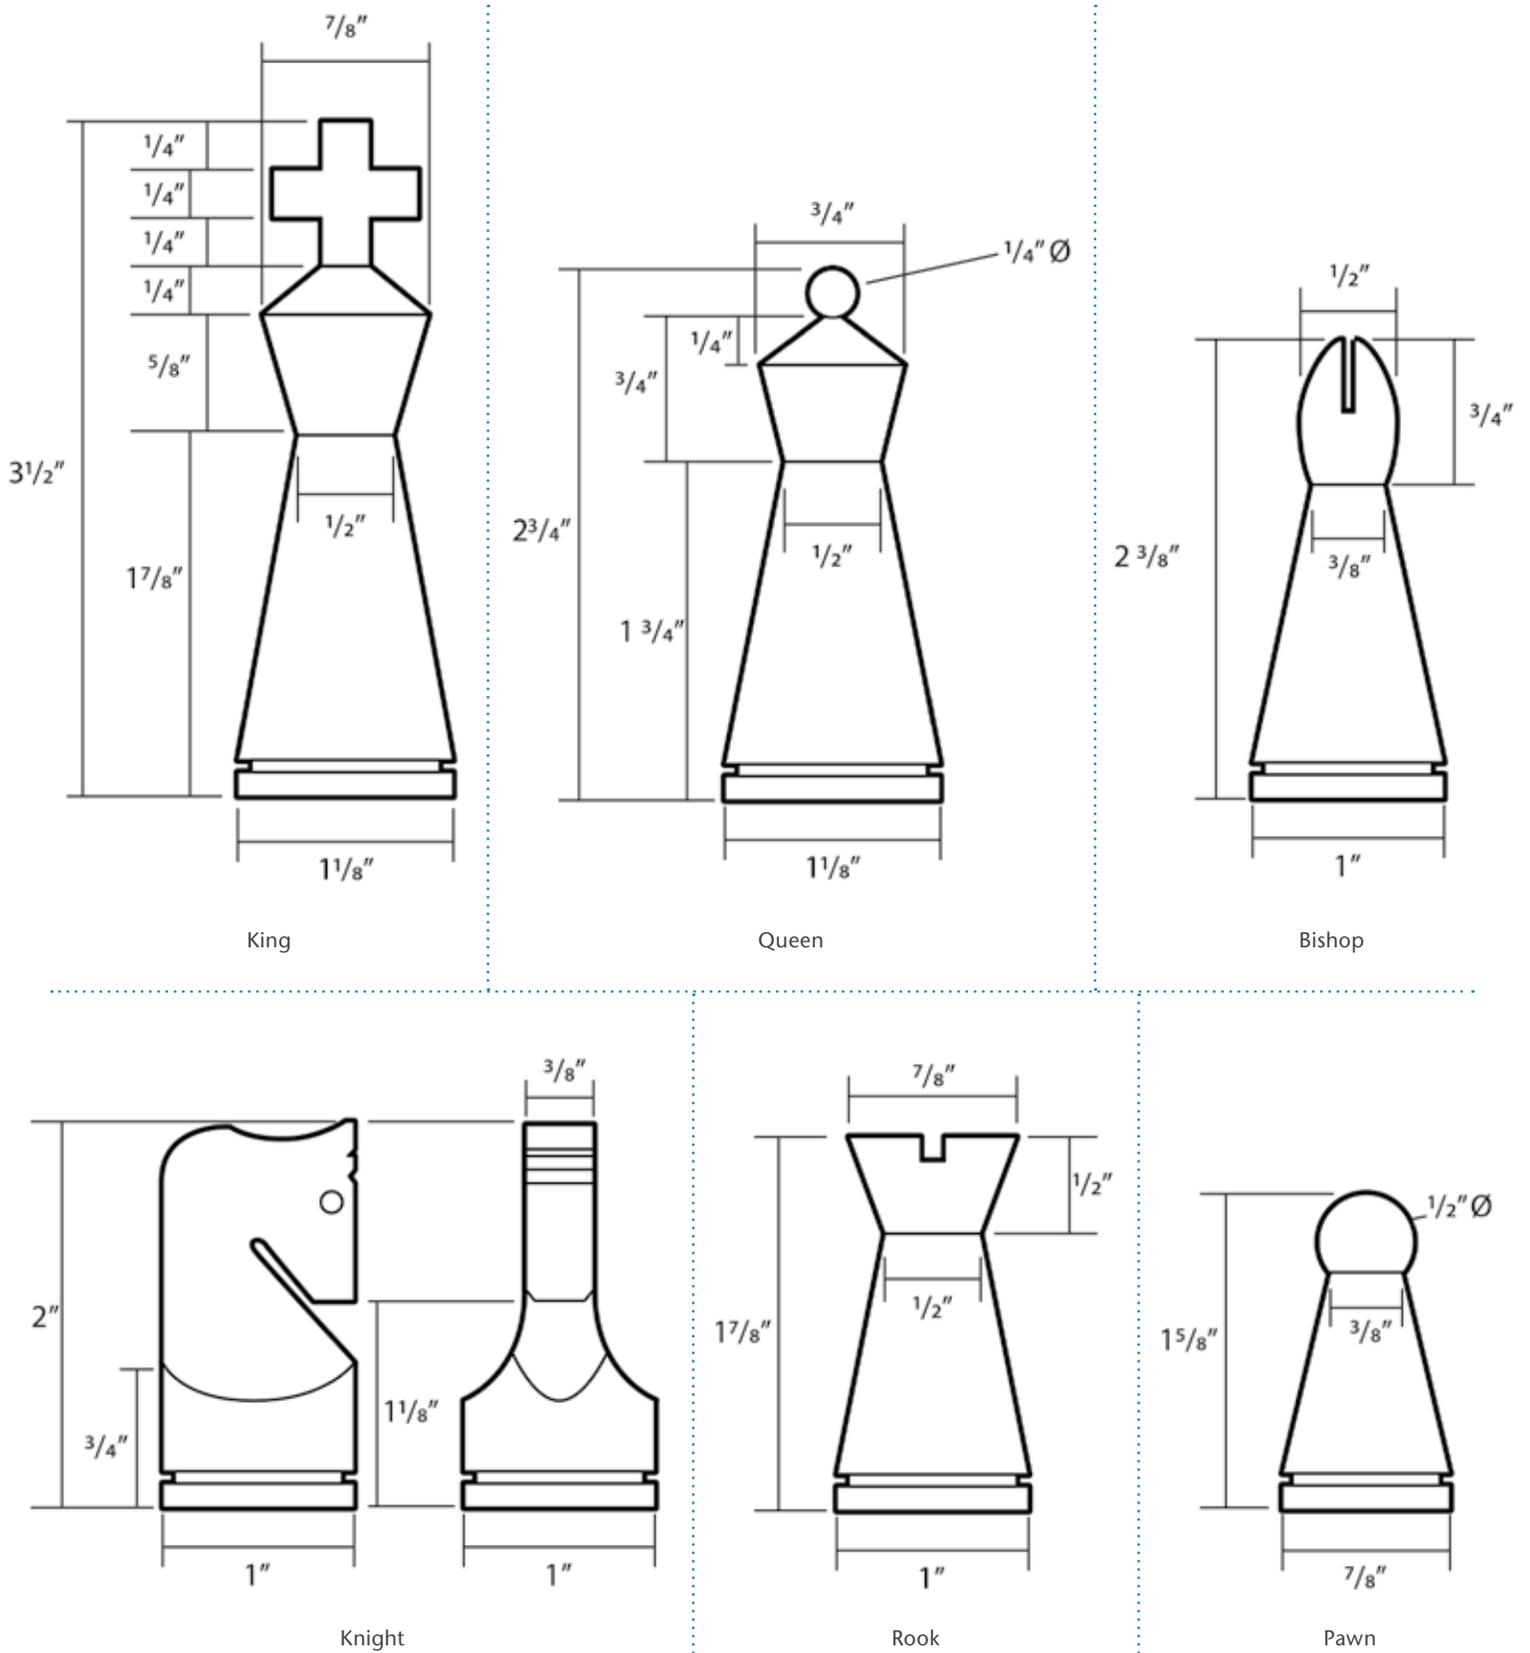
Photocopy these full-size drawings and glue to a thin sheet of cardboard. Use scissors to cut out each piece to use as a storyboard.
